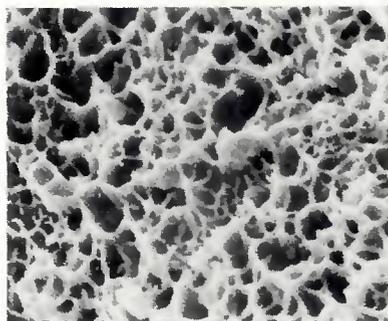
Typical fracture surface of a VAN-80 spot weld. X5000, reduced 18%
